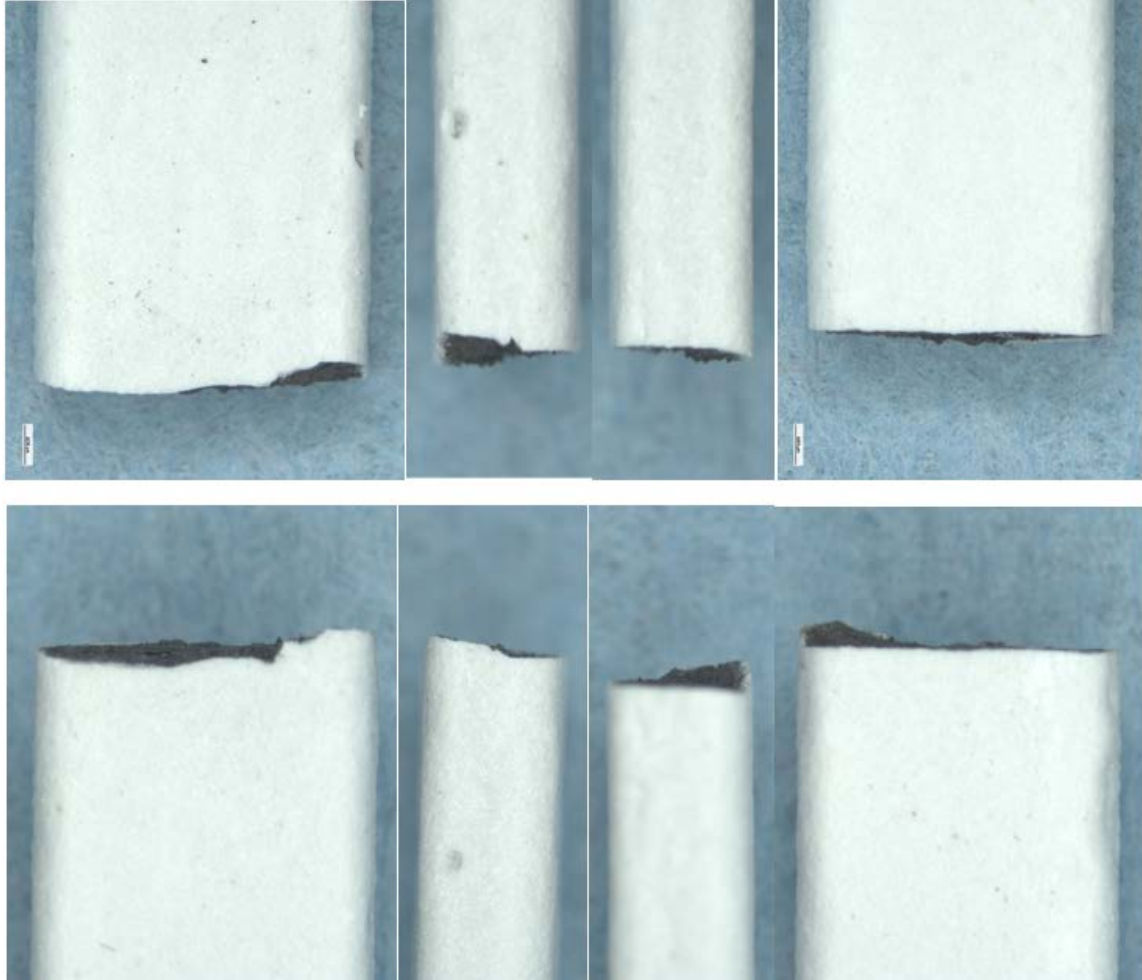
Fracture surfaces of specimen P15002-7, tested in fatigue at 1200°C in air.
